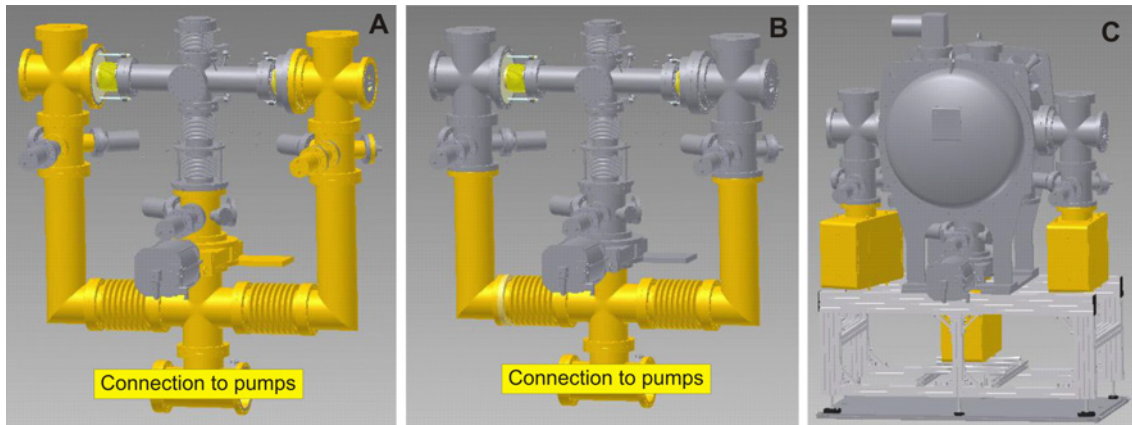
Warm parts of the UHV chamber (A), parts removed for after first installation (B) and new pump layout (C).
